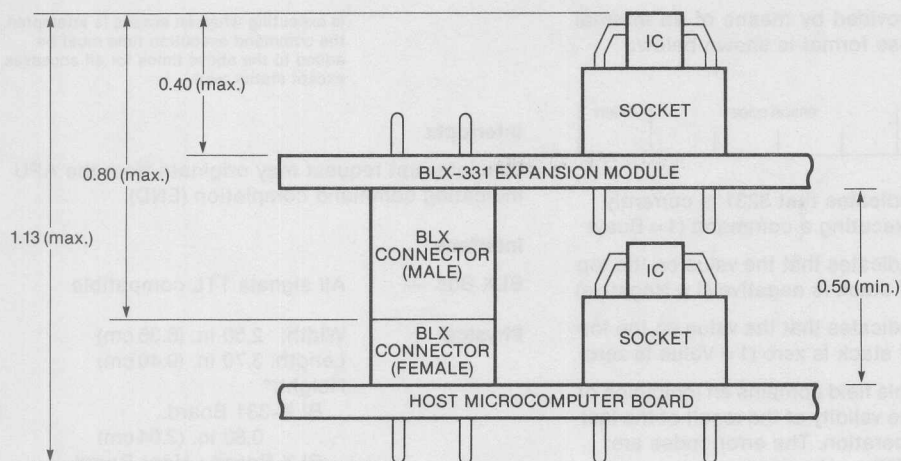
BLX-331 Expansion Module Mounting Clearances (inches)
